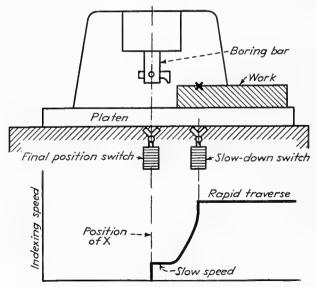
Accurate location of boring tools for indexing requires extremely slow speed of work table to prevent overtravel when stop limit is reached. A direct-current motor and control is used; heavy armature series resistance and armature parallel resistance provide for creep speeds for final positioning.
